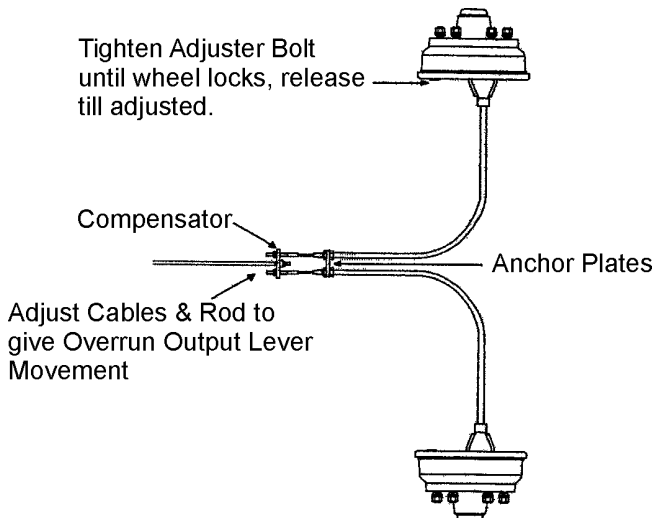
H. Connecting Cables to Compensator Handbrake Mounted On Drawbar
